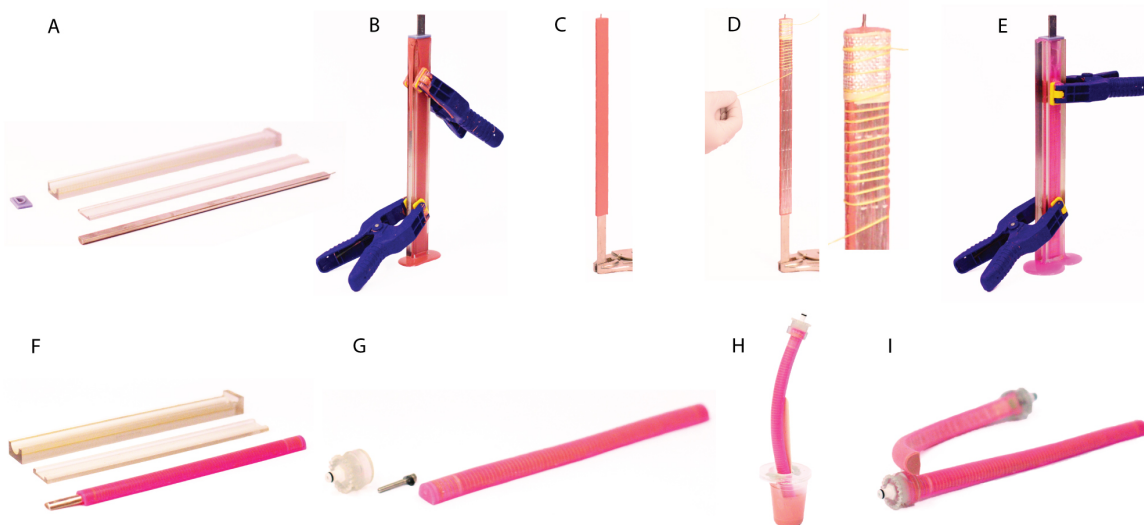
Pictures showing the fabrication process of boa-type grippers. (A) 3D-printed molds are used to cast the inner bladder of the actuator. (B) Casting of the inner bladder. (C) The Bladder is released from the mold and (D) covered with fiber reinforcements. (E) An outer layer is cast around the assembly to cover the fibers reinforcements. (F) The Actuator is removed from the second mold. (G) The half-round rod is removed and connective hardware is stalled through the open end of the actuator. (H) The open end of the actuator is sealed with rubber. (I) The final length of the actuator is 290 mm.
